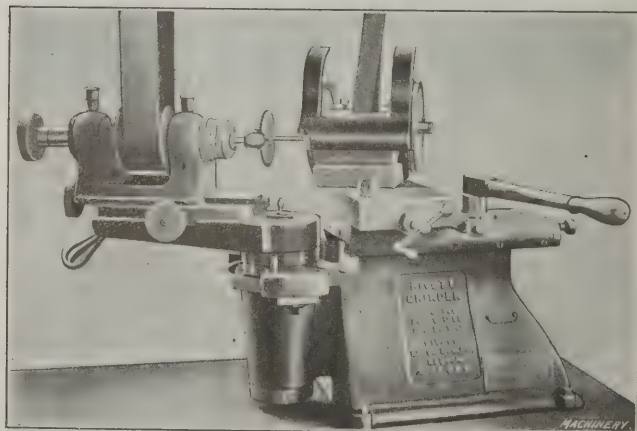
Ball-grinding on the Rivett No. 5 Grinding Machine
